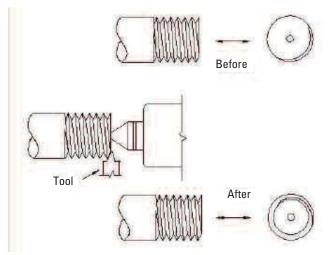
Chamfer the end of the thread to protect it from damage
